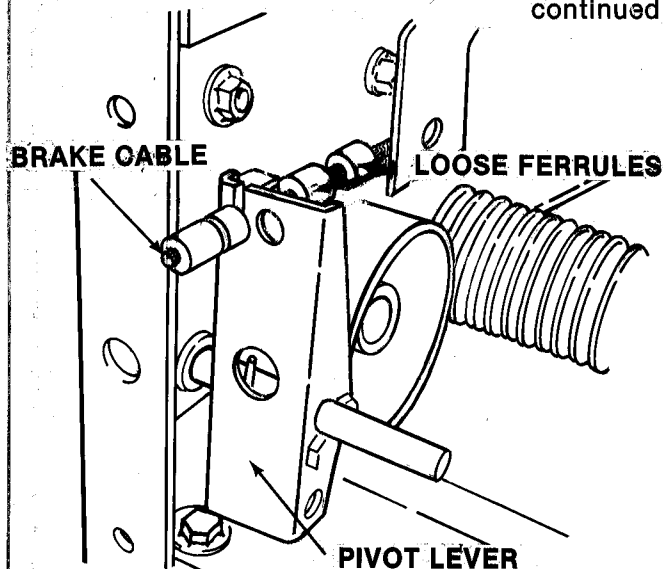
WHEEL BRAKE ADJUSTMENT
